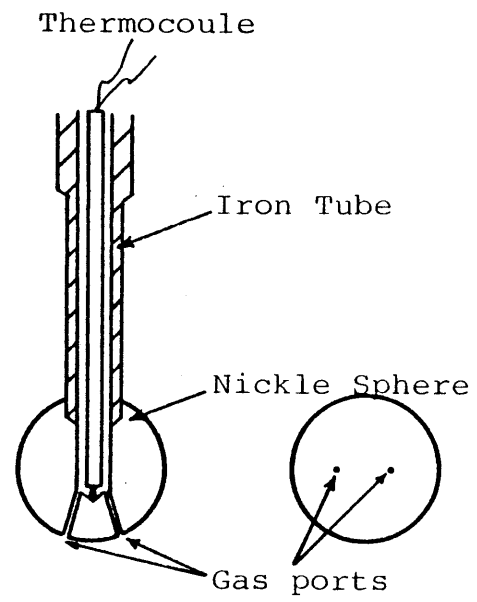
Cast Nickel Sphere (Rad., 9mm) and Thermocouple Assembly. Diameter of Gas Ports, 0.7 mm.
